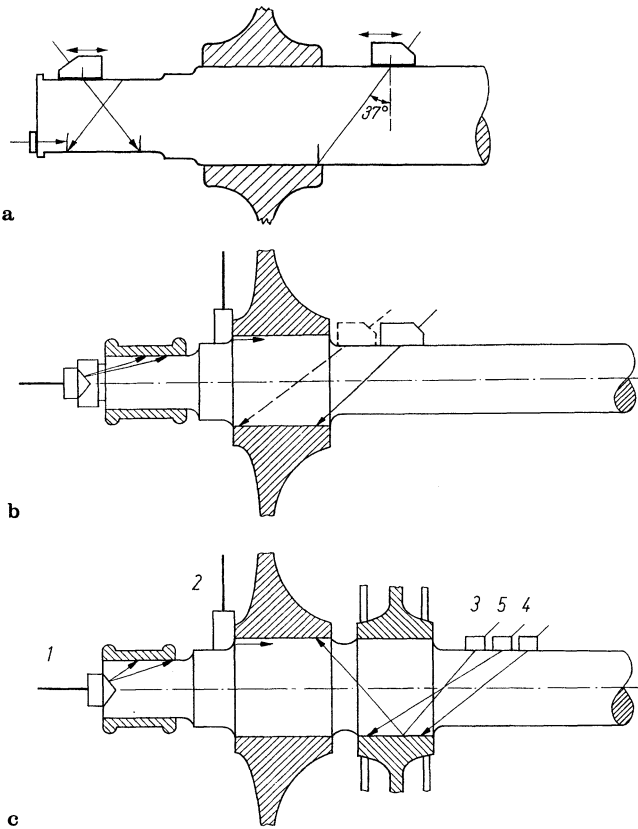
Examples of axles with outside bearings of the Deutsche Bundesbahn. a Of goods truck; b axle with roller bearing, bearing ring not removed; c same with additional brake disc
